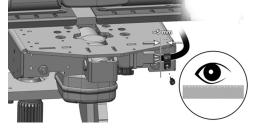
The cable bracket is mounted with the cable jacket protruding approximately 0.2".
